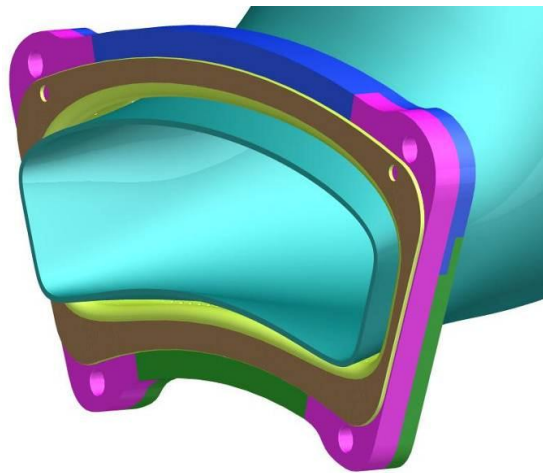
This is the new design of the current mounting which enable replacement relieve the mounting and replacement of the transition duct
